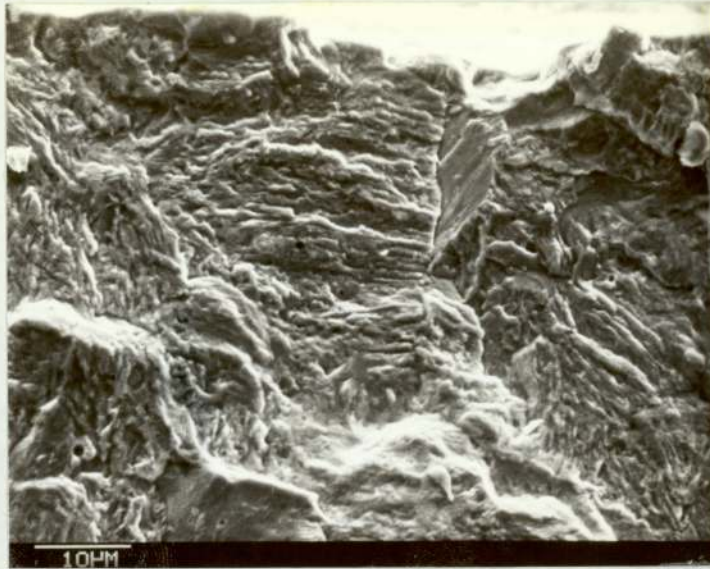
Fatigue fracture in carbonitrided case at the notch root, case depth 0.38 mm, root radius 0.13 mm,  $N_i = 459,120$
